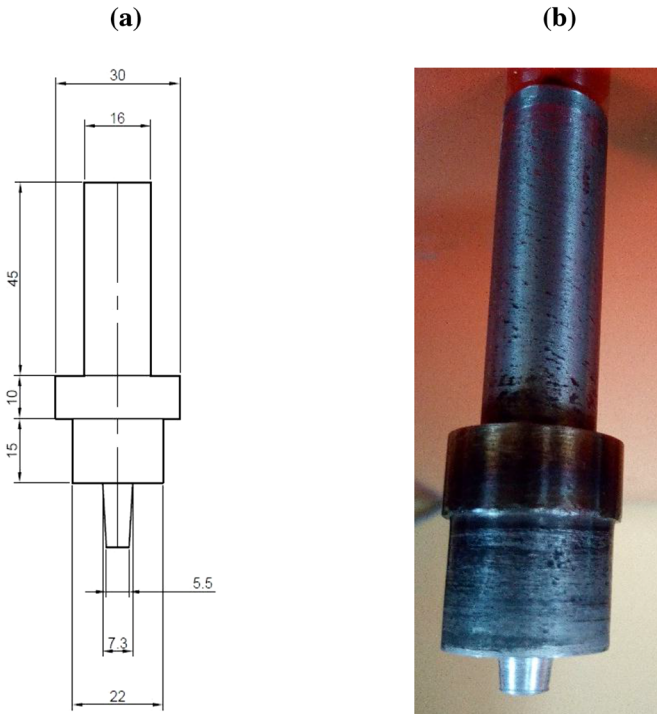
Tapered threaded tool (a) schematic diagram (b) picture.
